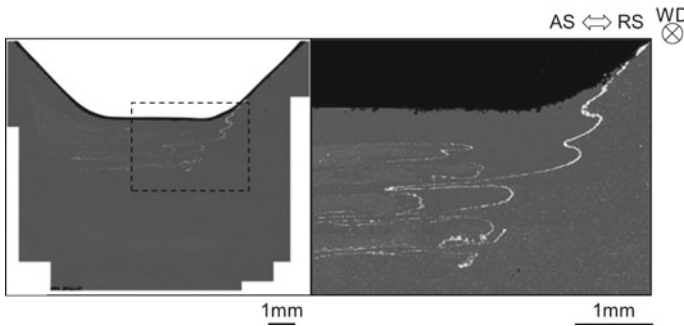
BSE images on cross section of the weld with no-coated plate and Ni-coated filler wire
